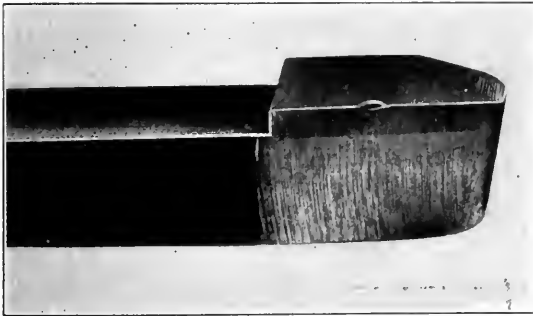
A Built-up Tool welded by the Rosner Process
